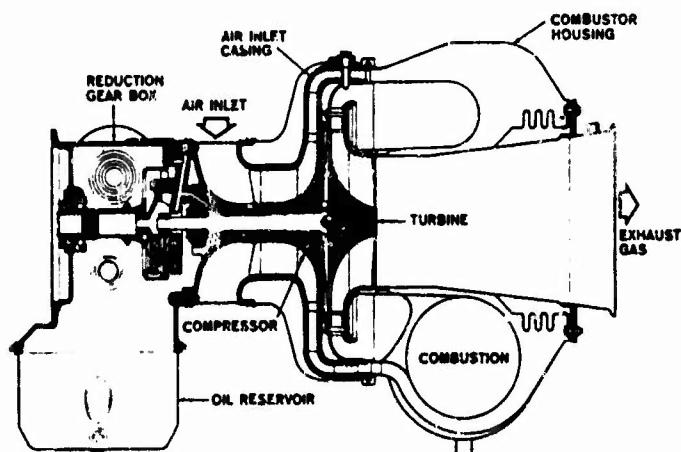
Small Single-Shaft Turbine Engine with Centrifugal Compressor and Radial-Inflow Gas-Producer Turbine
